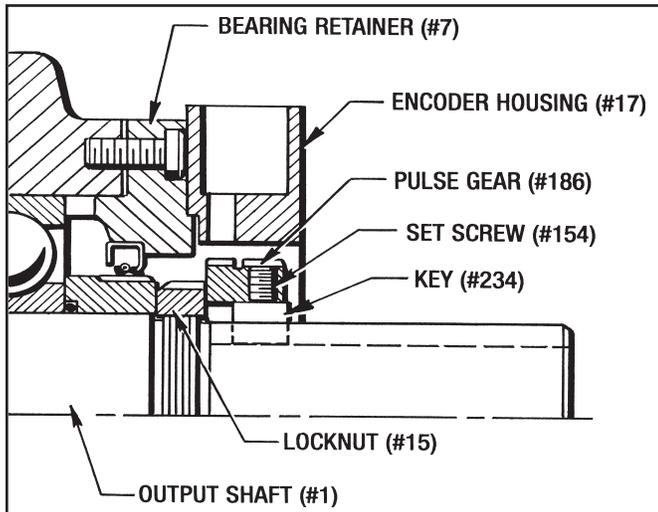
Pulse Gear Alignment (#20 w/o Reducer)
